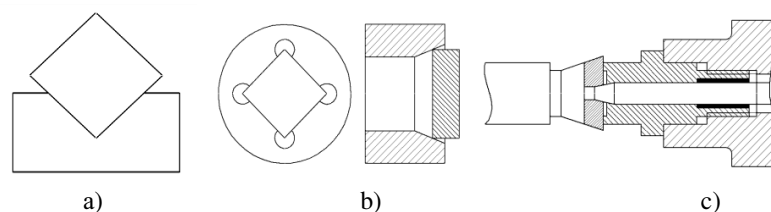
MI datum method: *a* - on the centering prism; *b* - in the centering bush, *c* - on the hole.
